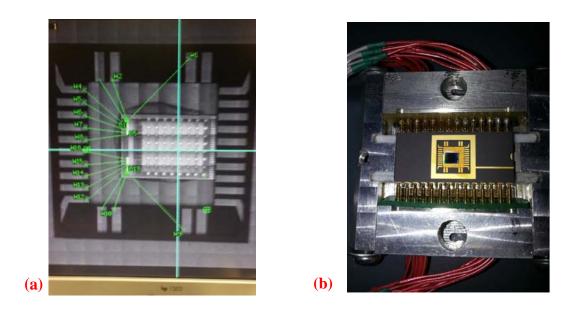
(a) 3088 automatic ball bonder recipe. (B.) packaged TCB chip in active custom fixture for in-situ operation on a the wire bonding machines.
